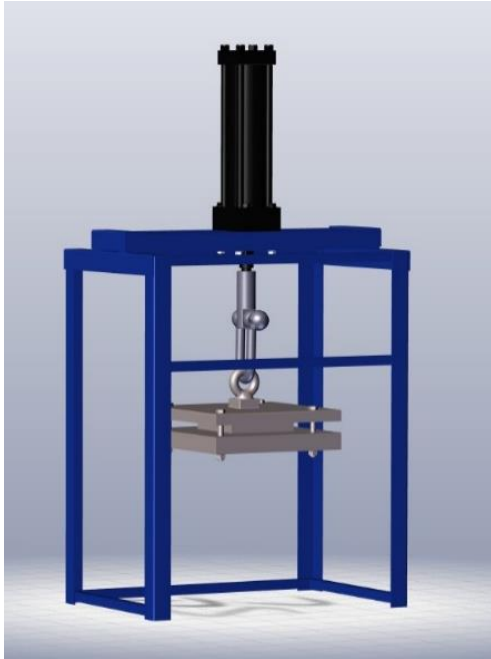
A bottom up hydraulic cylinder plays as a displacement pump (source cylinder)
